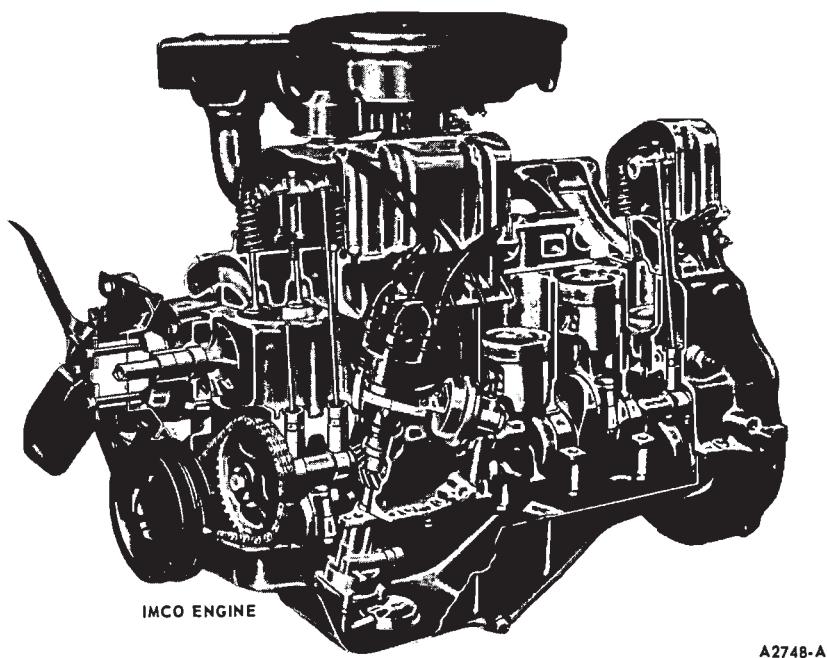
Sectional View of Typical Six-Cylinder Engine
